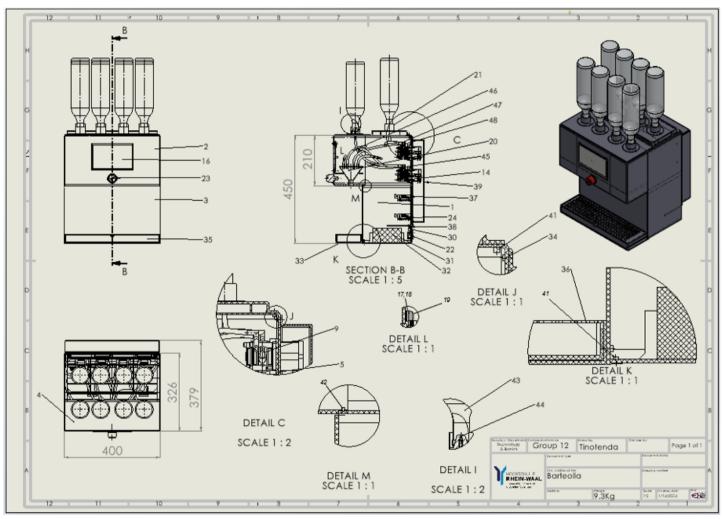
Technical Drawing for the cocktail mixer assembly.
